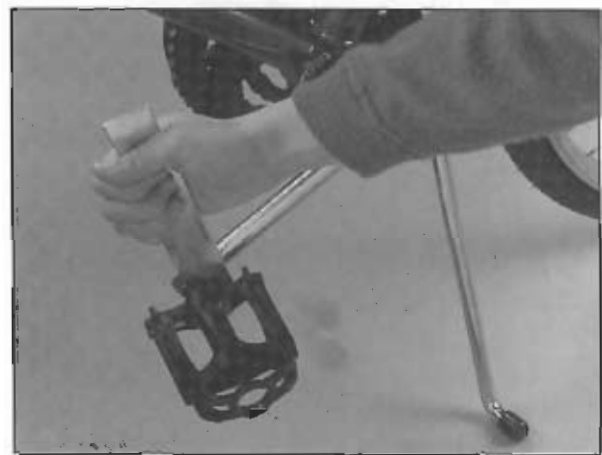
Attach the pedal to the crank arm with the flat wrench. The pedals are marked L or R on the end of the threaded stud for left and right side.
